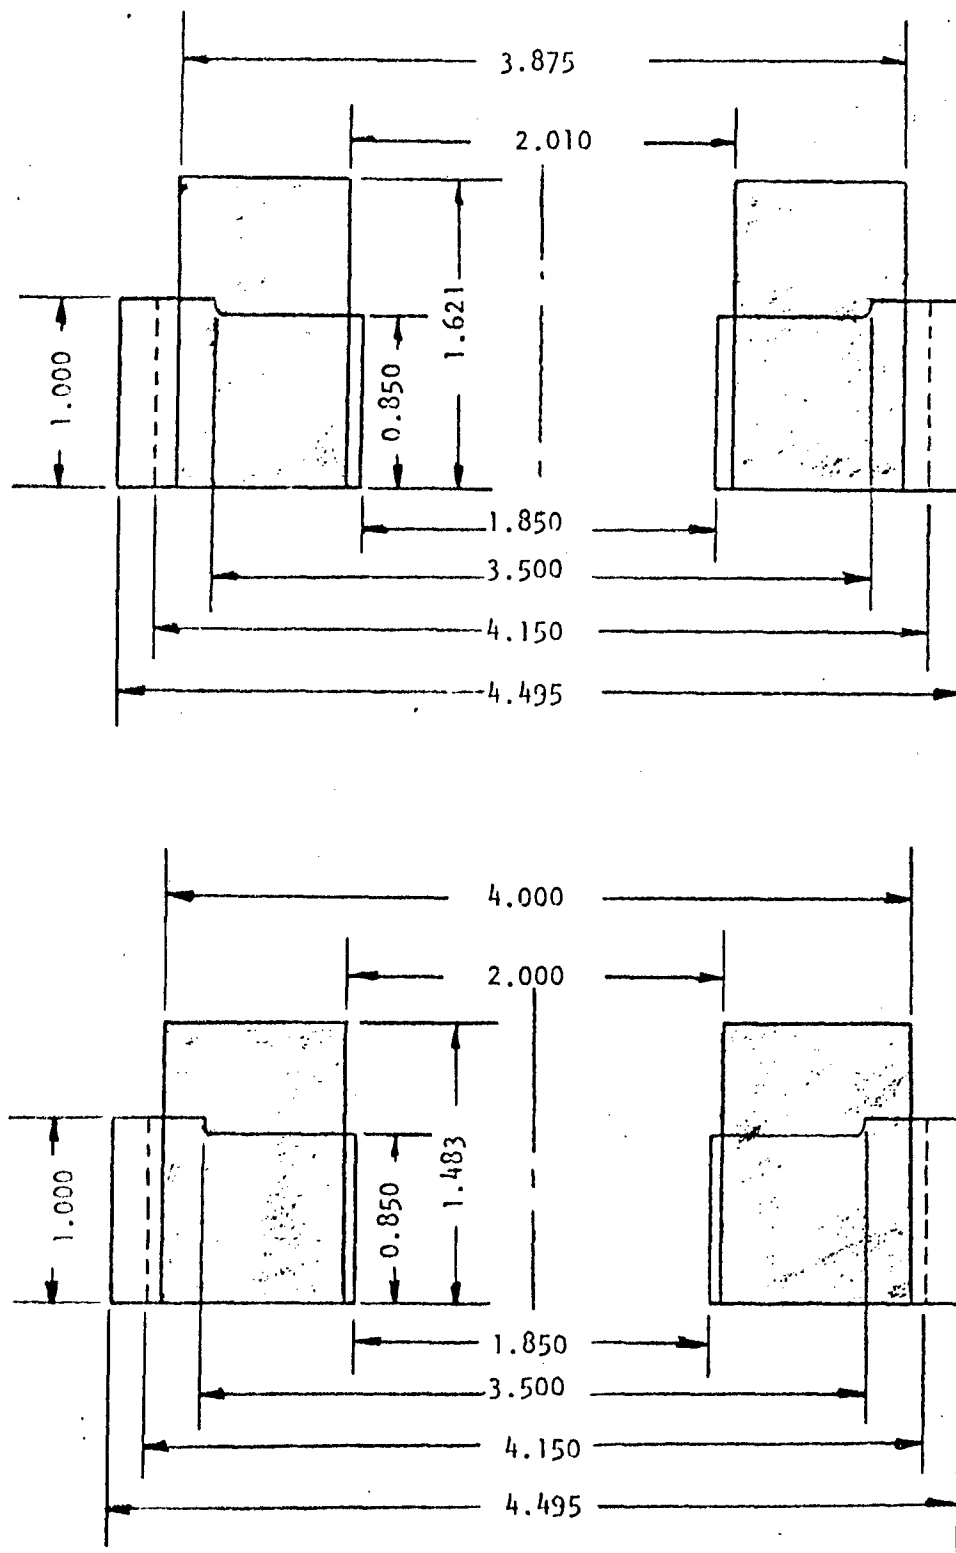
Schematic of Possible Preform Shapes (80% Density) and Forged Shapes for P/M Forging of No. 6 Accessory Gear in AGT 1500 Turbine.
